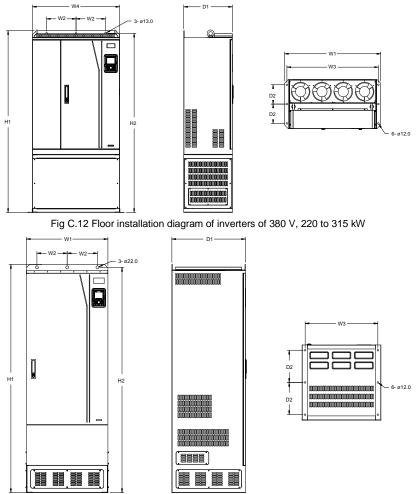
Floor installation diagram of inverters of 380 V, 355 to 500 kW
